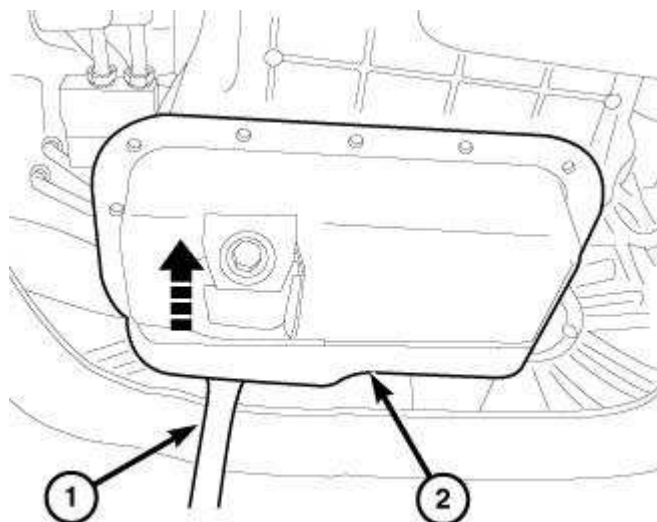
Bolts, Studs, Nuts & Lower Oil Pan
